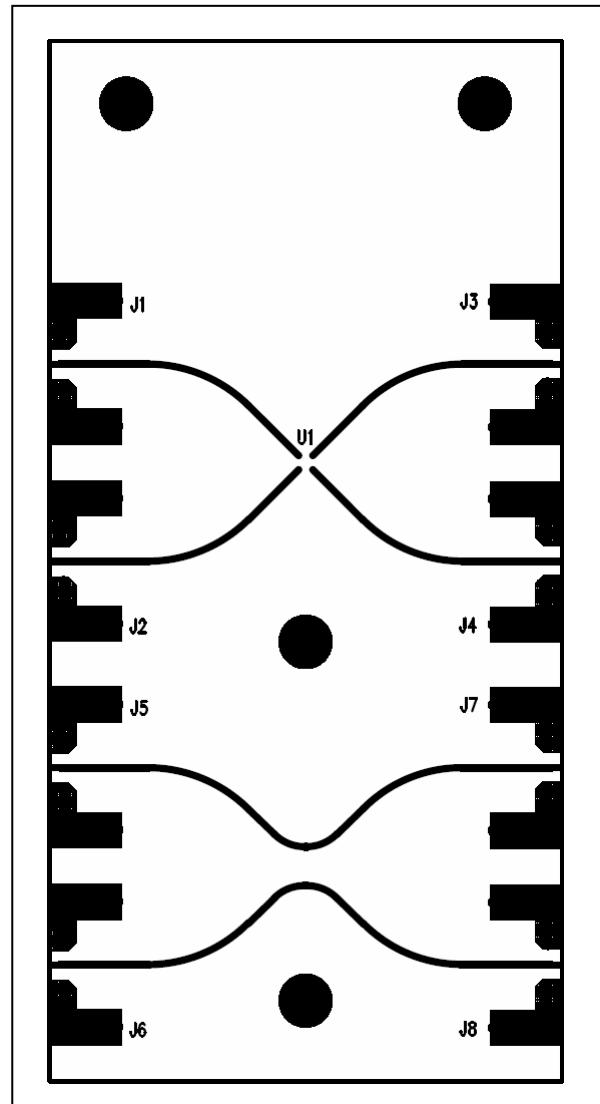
MAX3787 EV Kit PC Board Layout—Component Side
